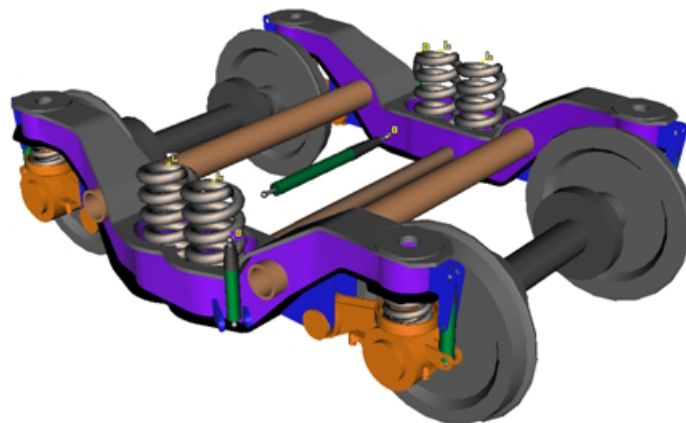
The subsystem “Wheel couple with axle equipment”
